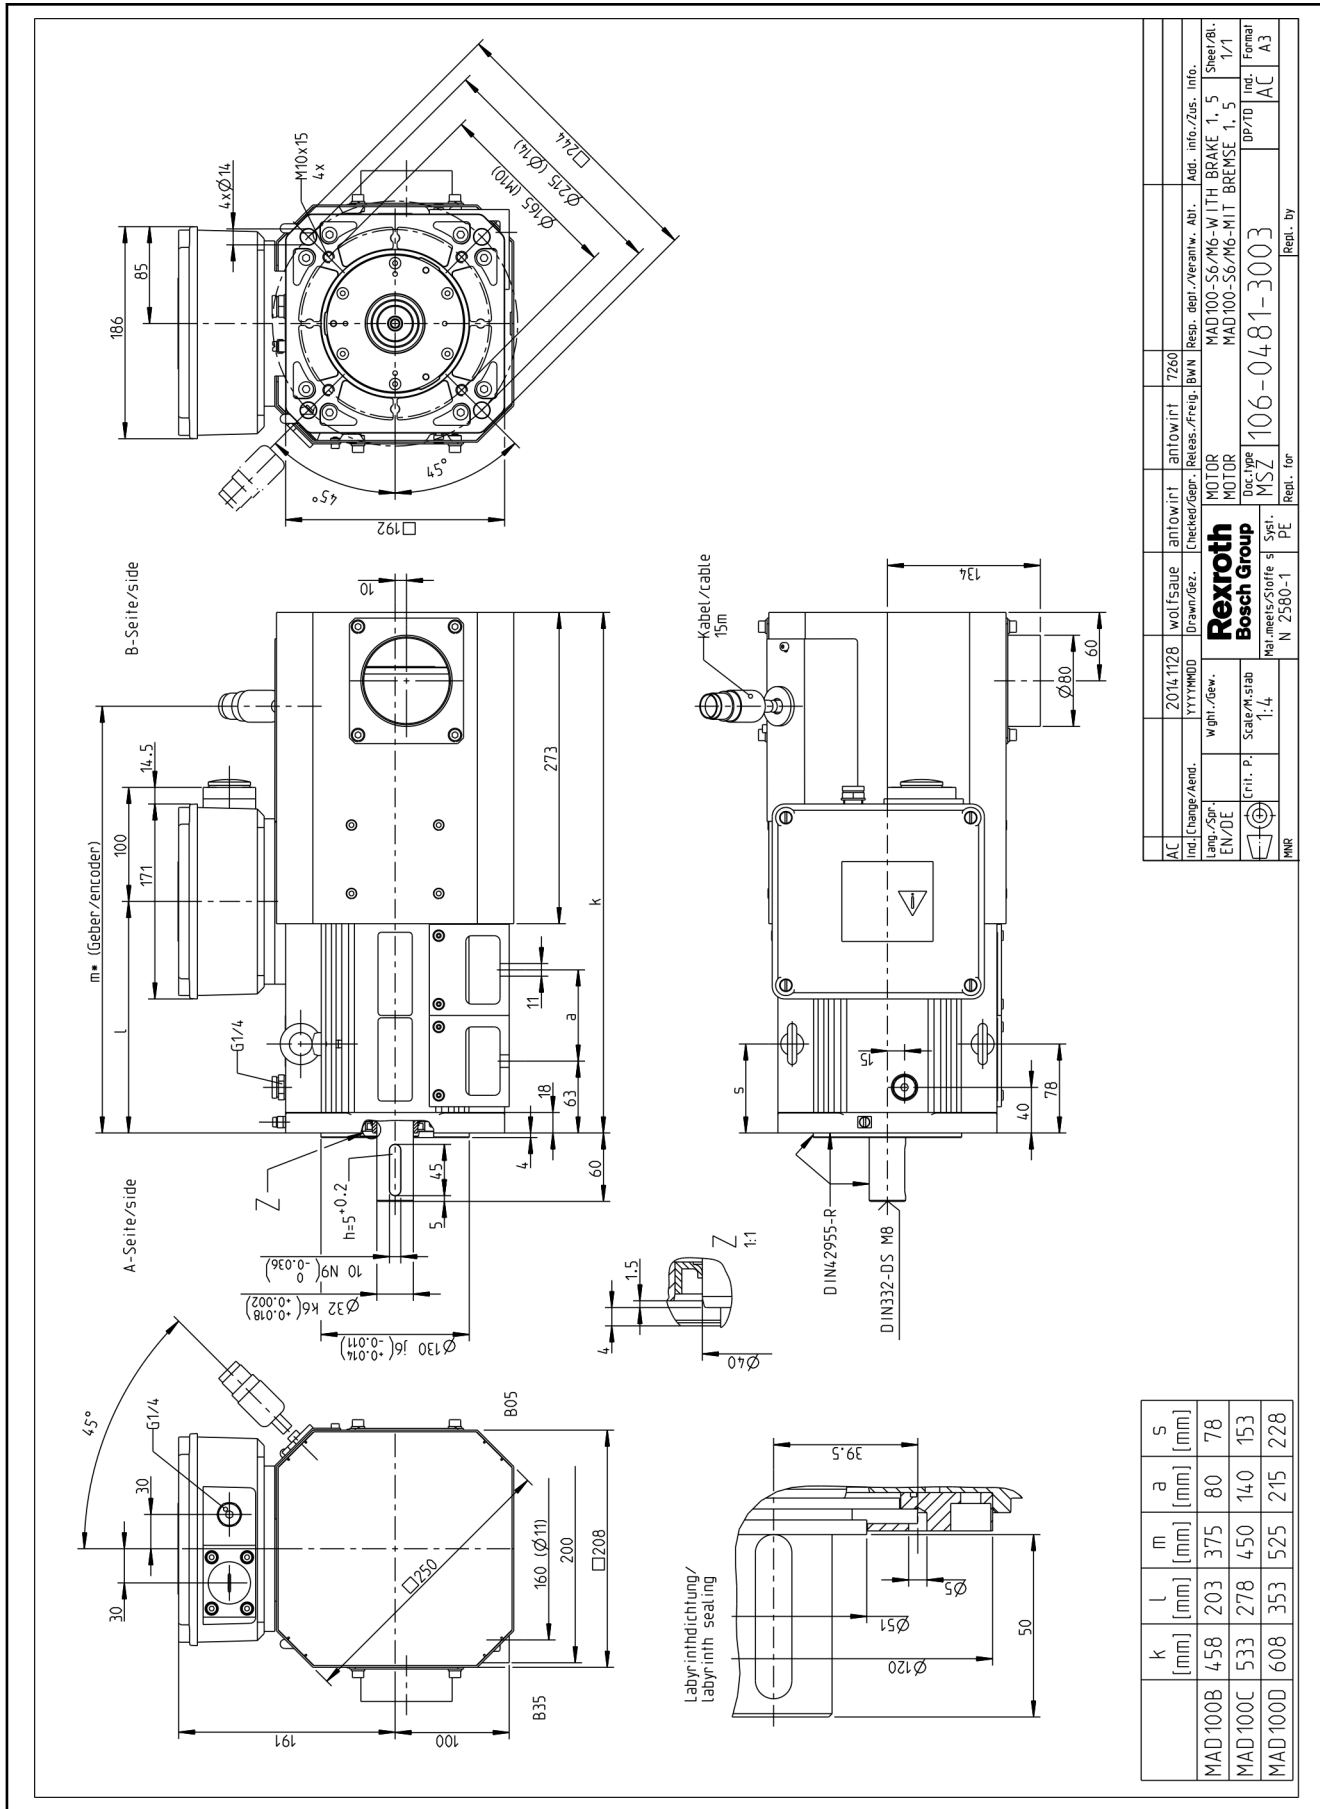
MAD100 with M6/S6 encoder, brake 1/5
